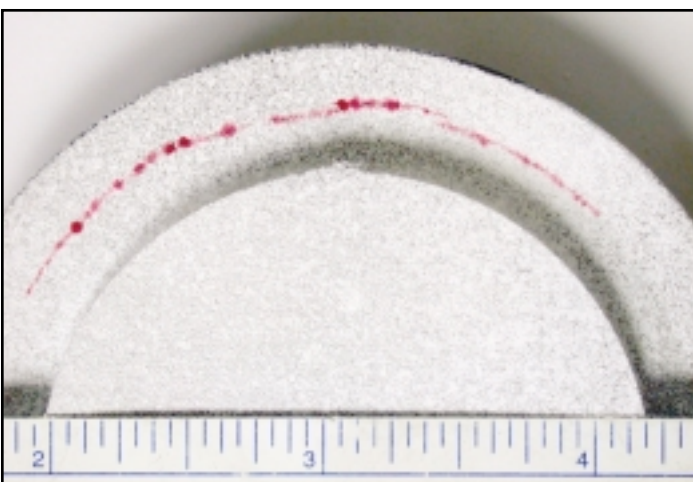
Liquid Penetrant Inspection of the shaft produced an indication which confirmed the suspected mid-wall crack.
